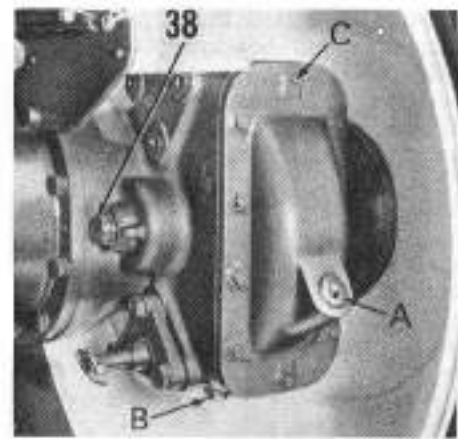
View showing location of model 1200 axle bearing adjusting screw at inner side of final drive housing
